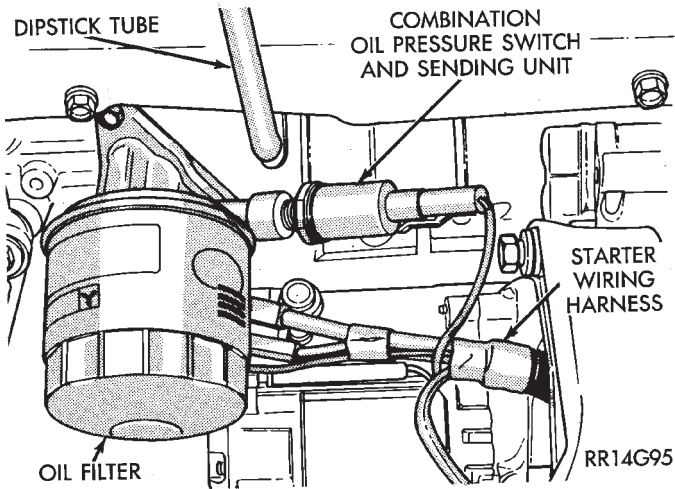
Oil Pressure Sending Unit Electrical Connection
